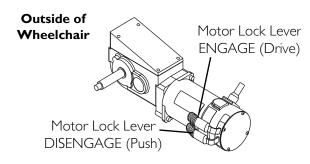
Disengaging/Engaging Motor Lock Levers - Standard and Heavy Duty 4 Pole Motors
